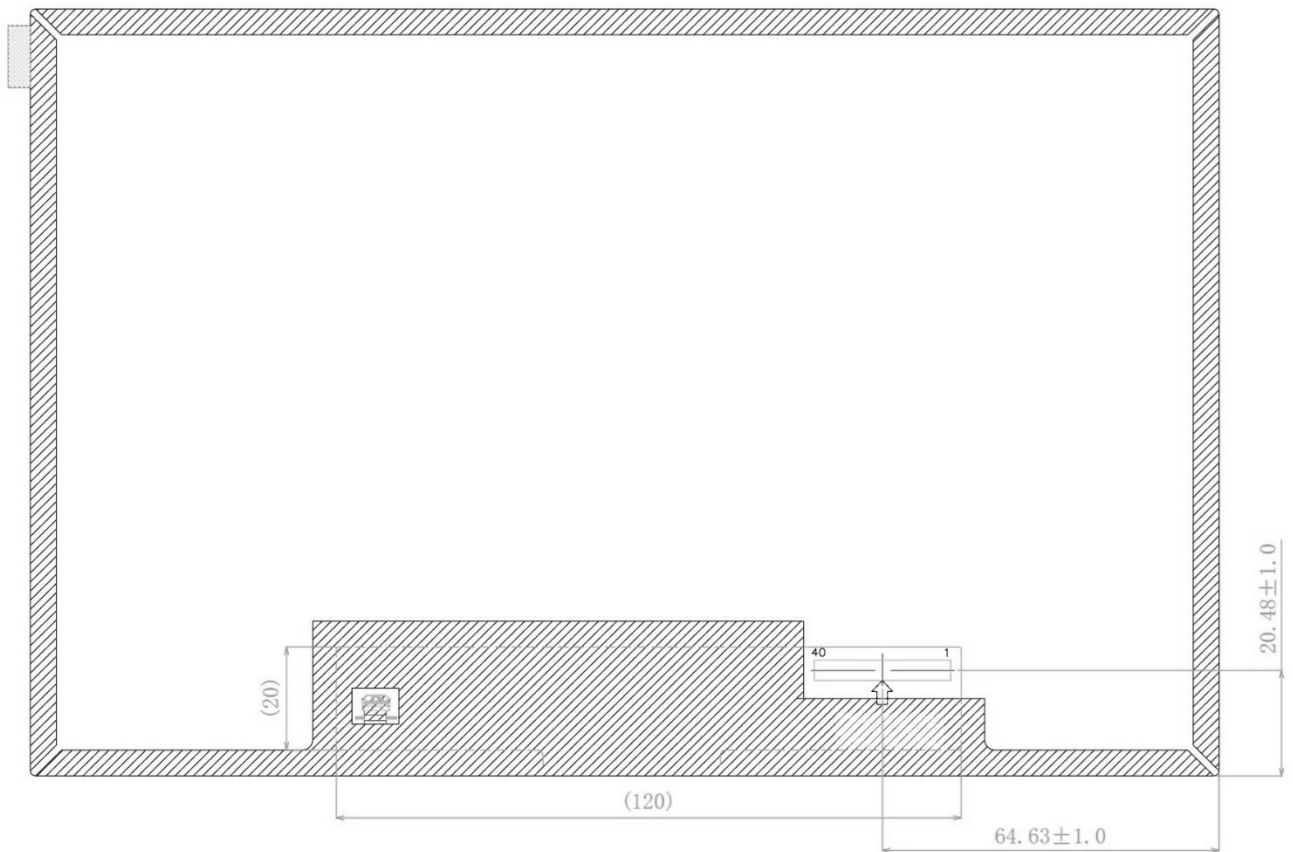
TFT-LCD Module Outline Dimensions (Rear view)
